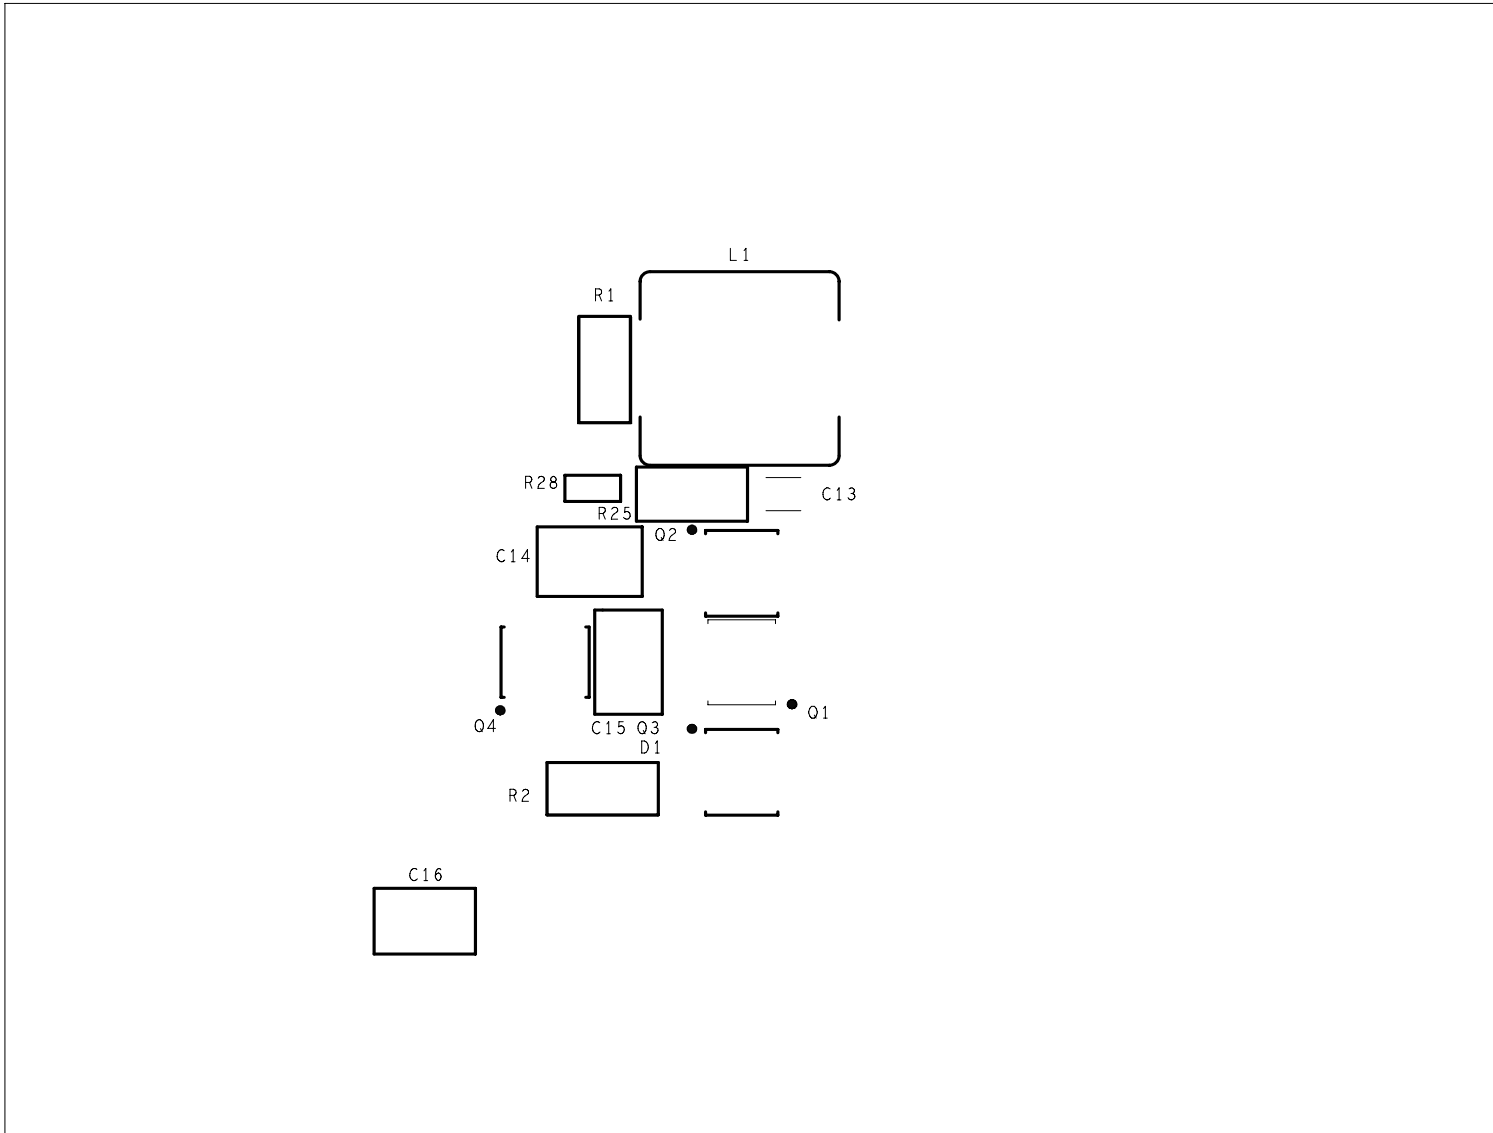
BOTTOM SILK (BOTTOM VIEW)
